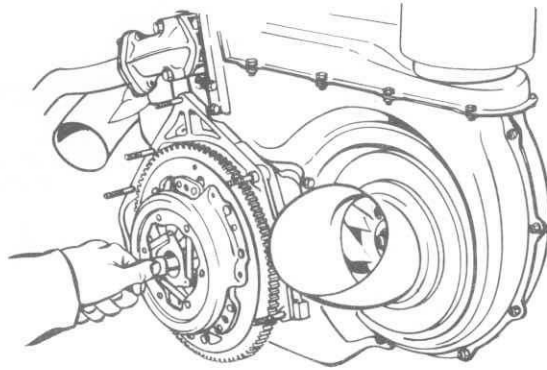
6 Pilot being used to centralise the disc when fitting clutch cover assembly to flywheel
